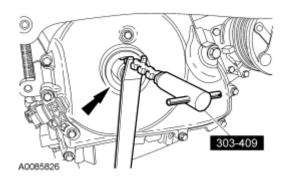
Locating Crankshaft Front Oil Seal And Special Tool (303-409) Courtesy of FORD MOTOR CO.
